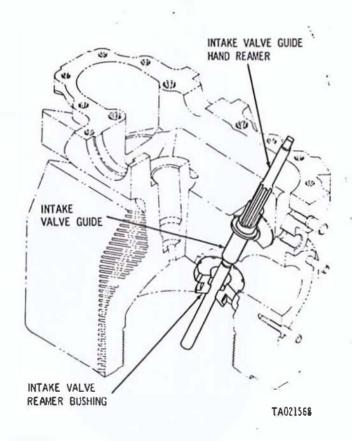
Intake valve guide hand reamer bushing positioning in cylinder head - sectional view
